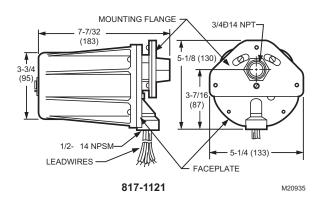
Ultraviolet Self-Check detector, mounting dimensions in inches (mm).
